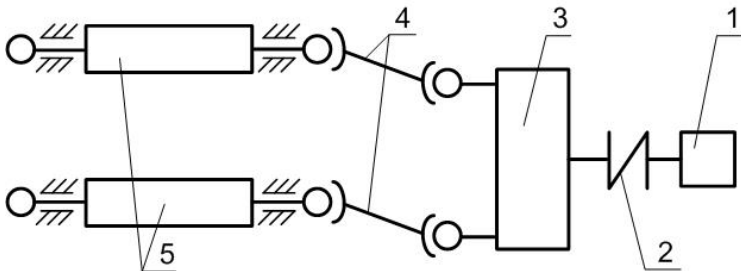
Kinematic scheme of the rolling mill stand electric drive
